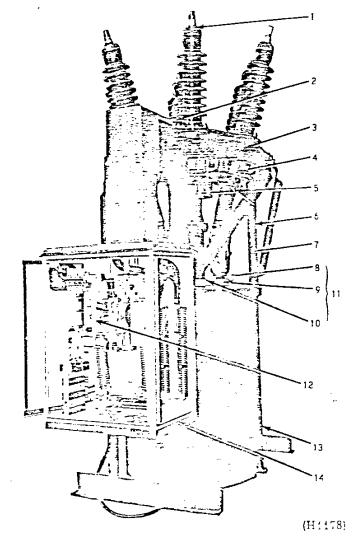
TYPE FKP BREAKER - MAJOR ASSEMBLY UNITS
